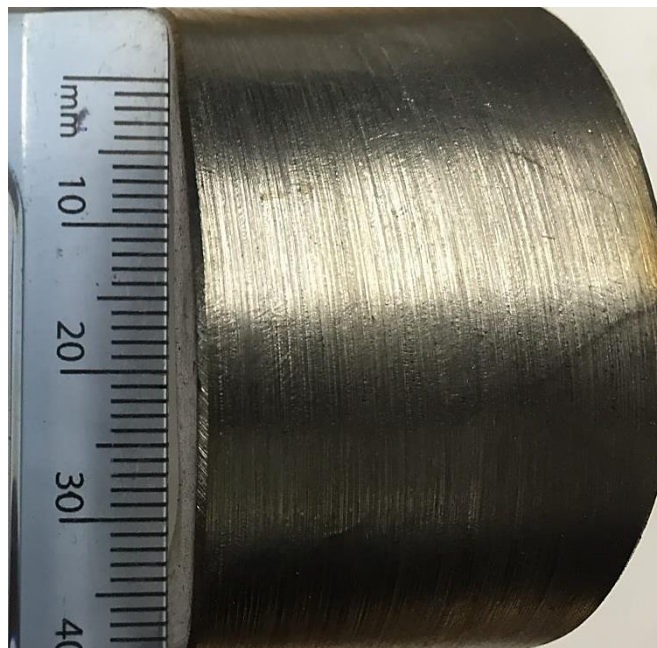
Sample 4 side bend test, face view (Material was welded in the service exposed condition and experienced no new thermal conditions prior to testing).
